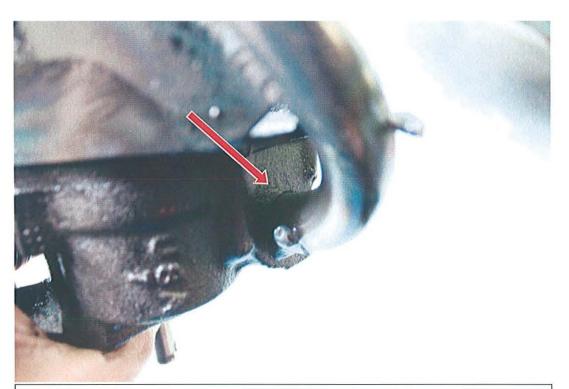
#378R: Oil pump and oil pump pickup tube partially welded interface
